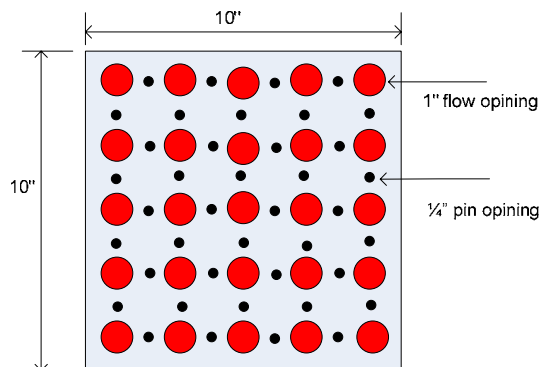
c Top view of the Lower Plate with 25.4 mm (1") Flow Opening Holes and 6 mm (1/4") Pins Holes
